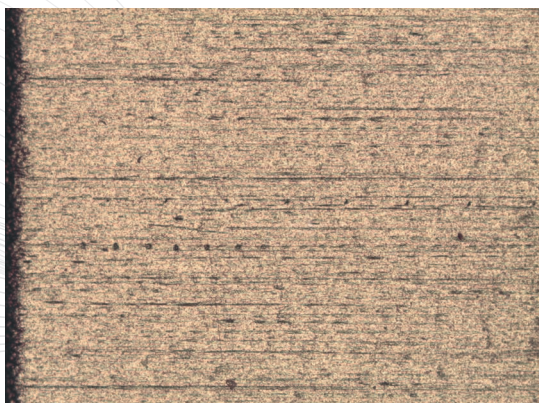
Scratches on a PCB surface caused by mechanical pretreatment of the copper
